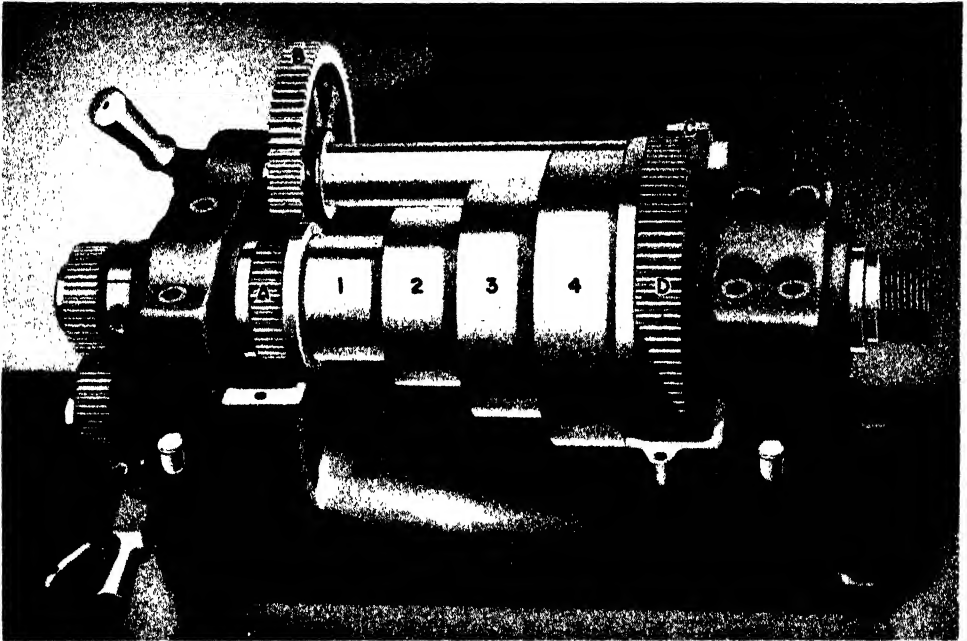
BACK GEARS. (Courtesy, South Bend Lathe Works.)
